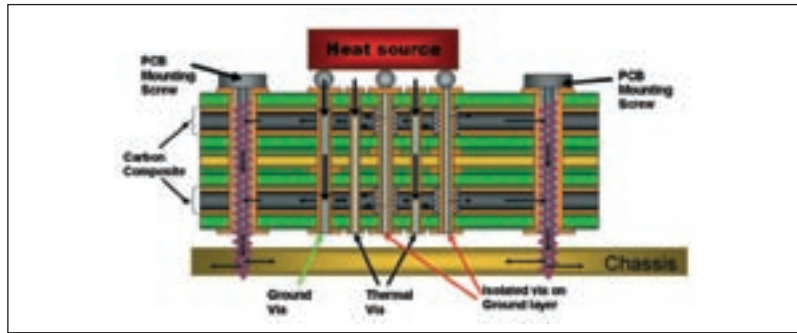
Schematic diagram of a Carbon composite PCB showing heat path from the source to the chassis
